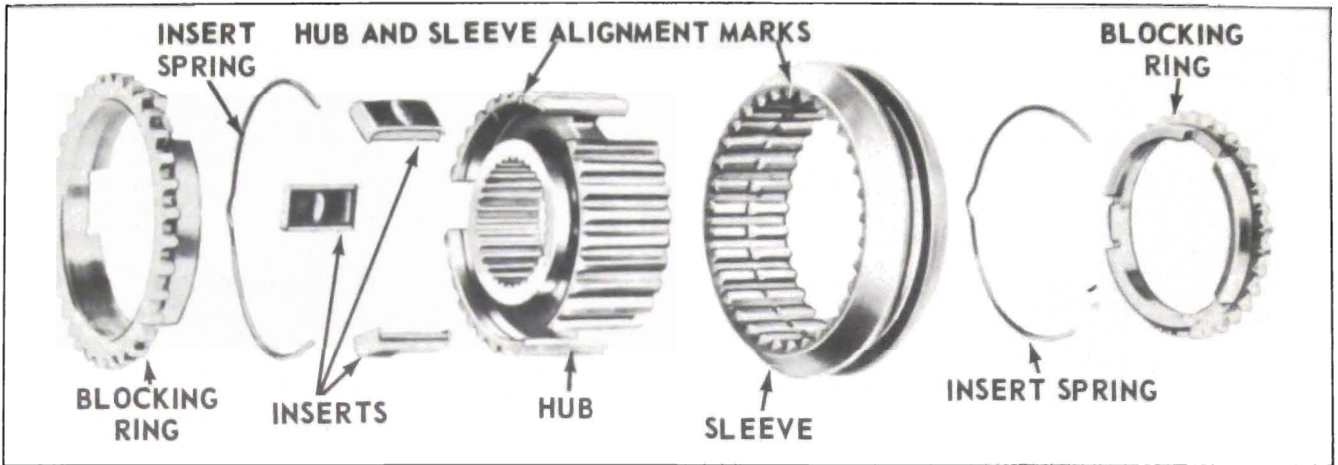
Exploded View of 2nd - 3rd Synchronizer
